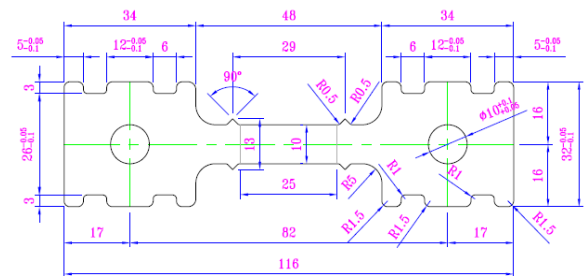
Dimension of high temperature tensile test specimens (ASTM E8/E8M-15a)
